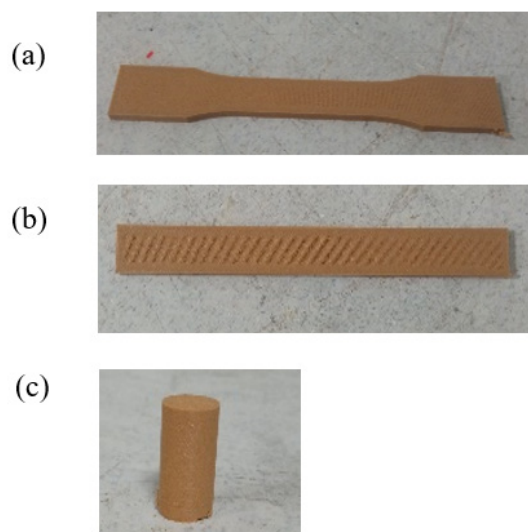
Printed sample for (a) tensile, (b) flexural, and (c) compressive tests
